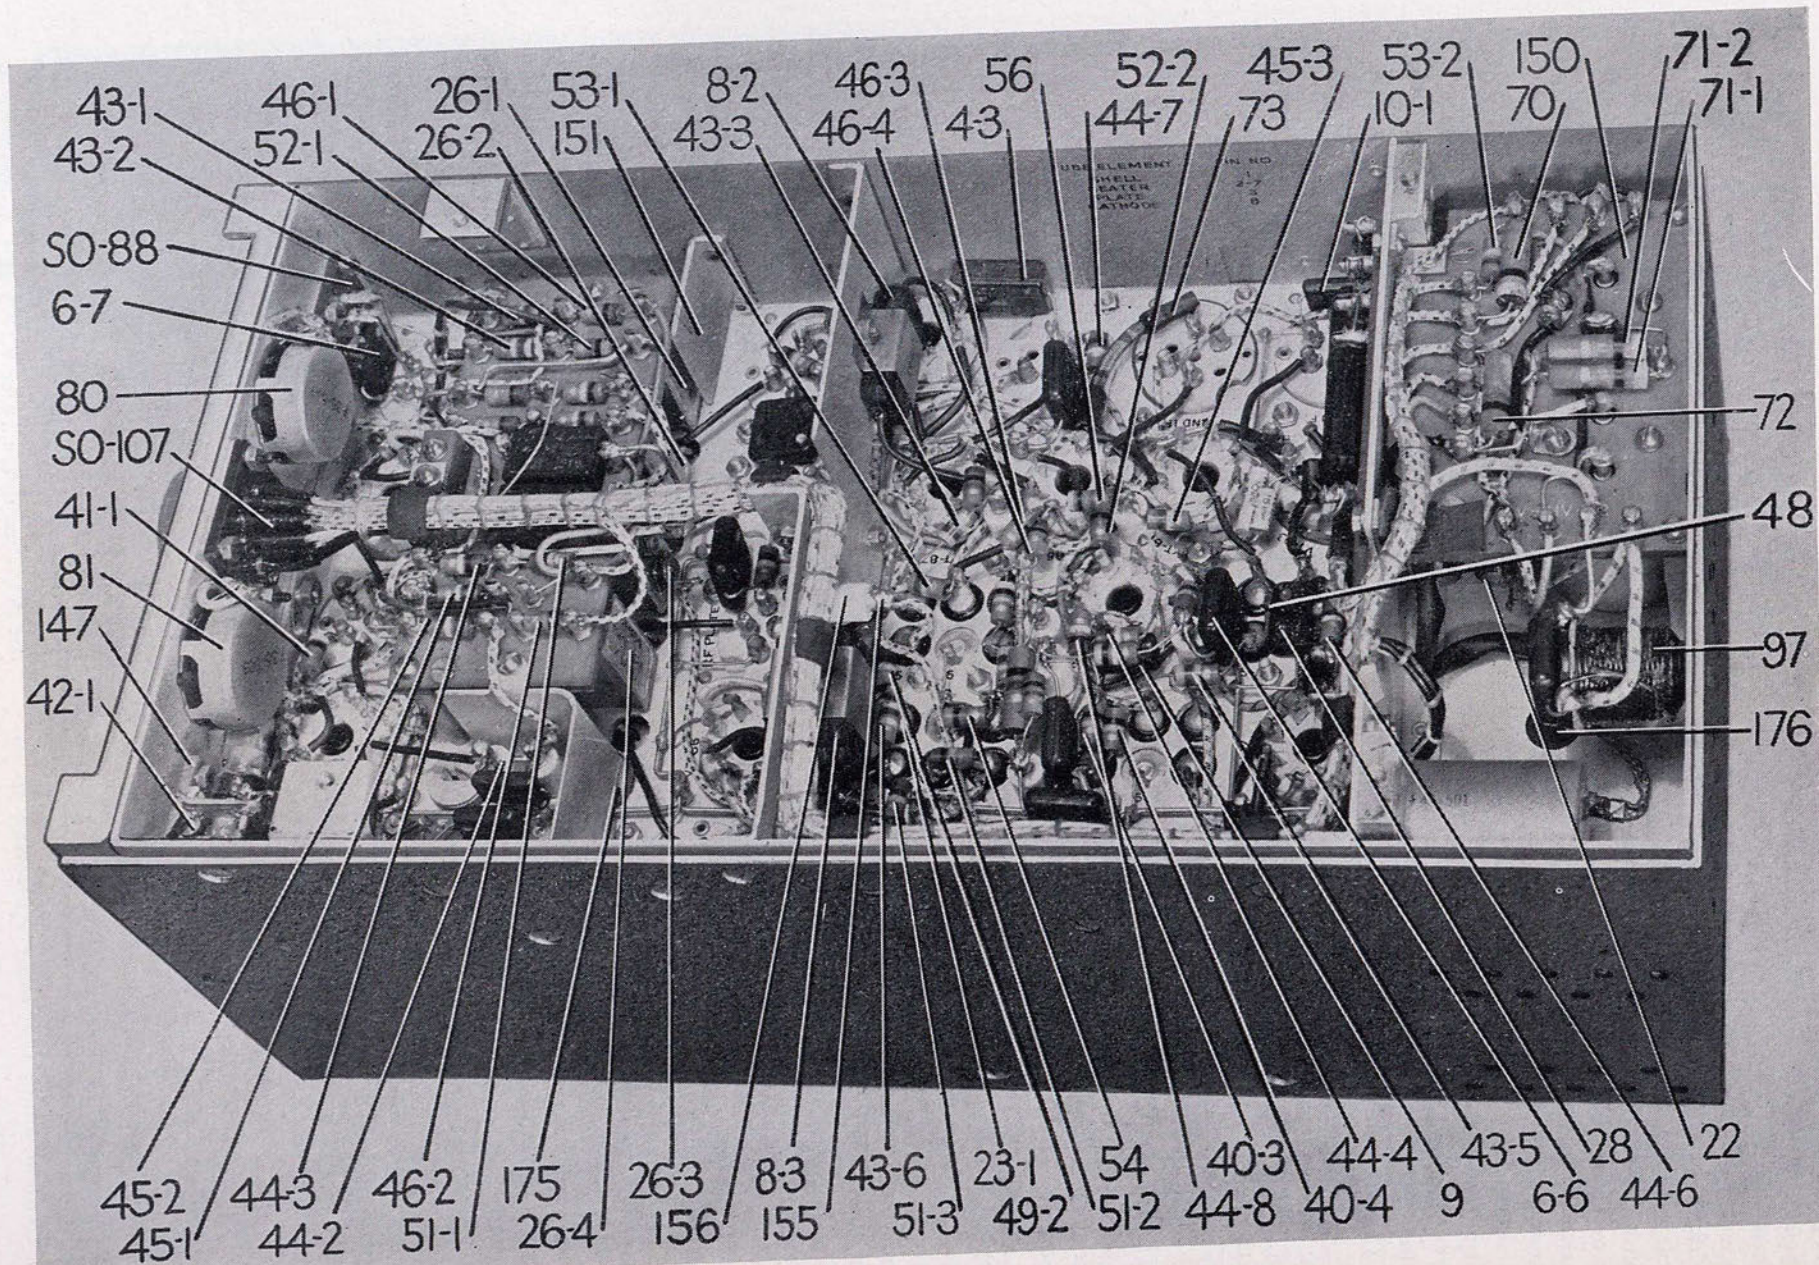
RADIO COMPASS UNIT BC-373-A, BOTTOM VIEW REAR
